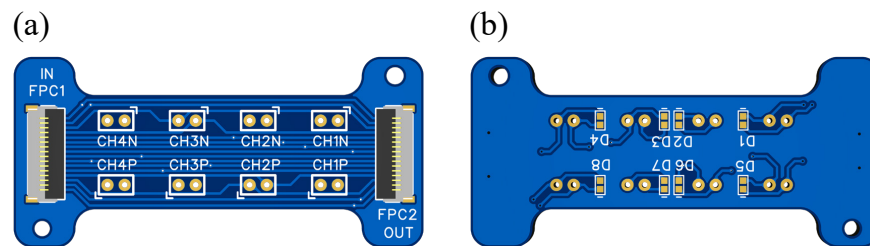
Structure of the valve interface board: (a) Top view; (b) Bottom view.
